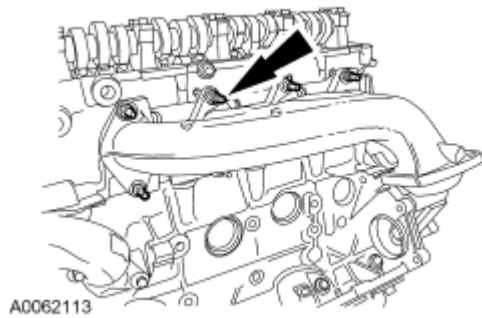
Locating LH Exhaust Manifold Nuts And Studs
